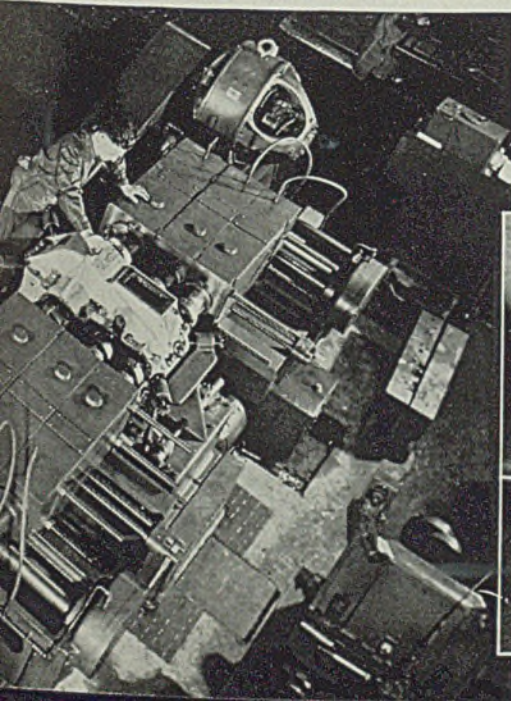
This special 6-spindle boring machine is used for boring bearing seats in cases of double-reduction gears. Individual spindles are adjustable; center distances are set by means of gage blocks
